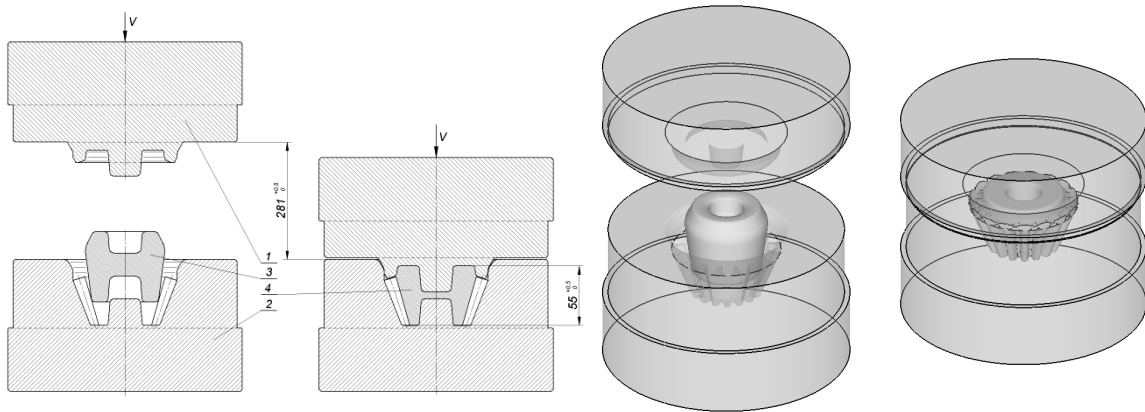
Geometrical model of forging of toothed wheel in finishing impression (description in the paper)
